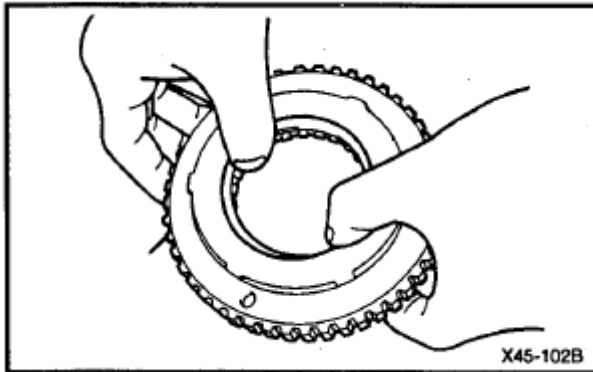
Pushing Overrunning Clutch Out Of Outer Race
